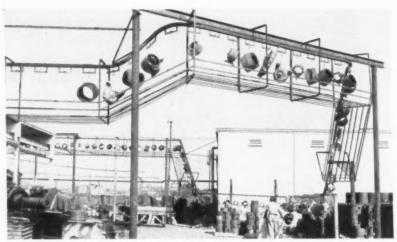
Rough stock conveyor loaded in the casting storage yard.
